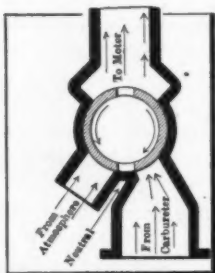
Section of a valve in the intake manifold for use when the motor is a drag on the down grade
